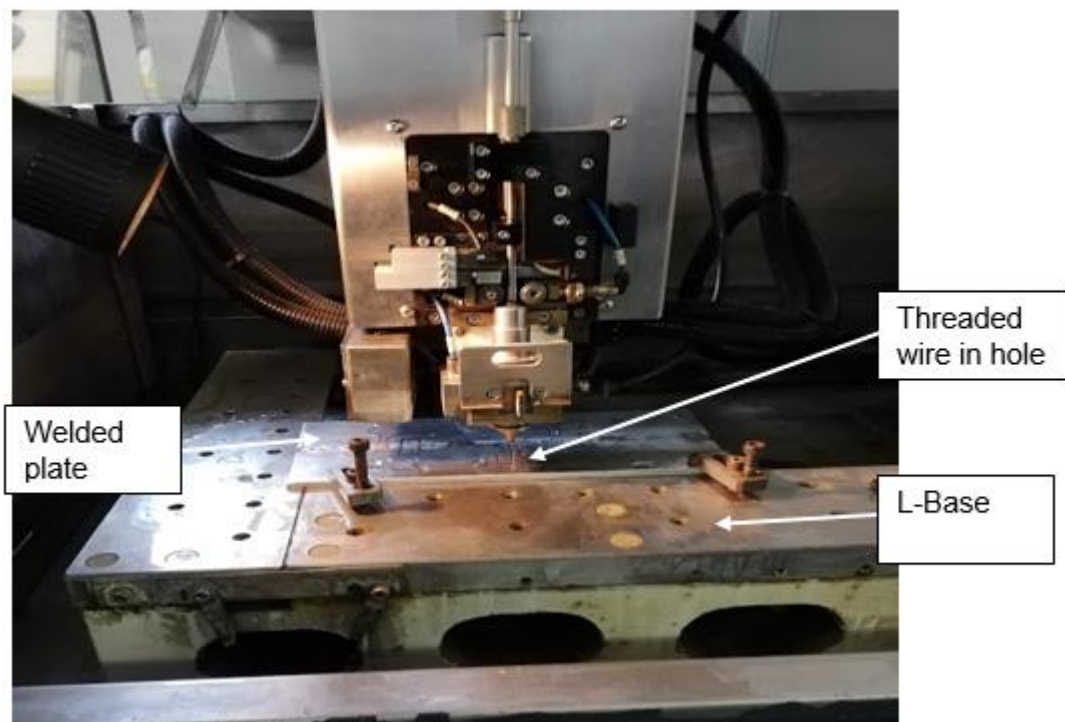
Shows two welded plates placed and clamped in the wire cutter.
